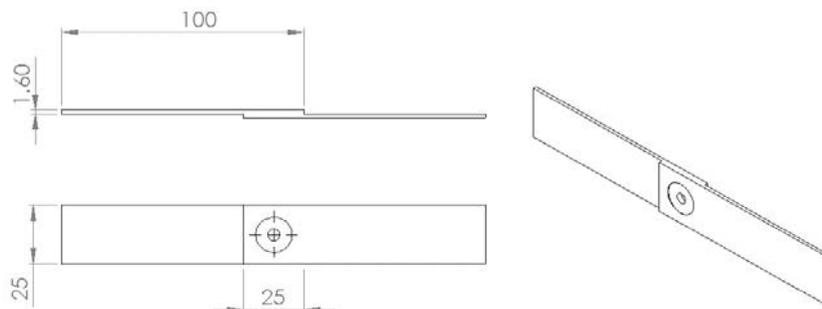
Dimensions of the tensile test specimen. (All dimension in mm).
